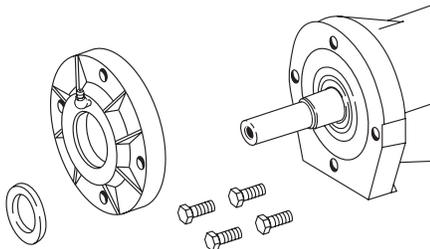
2520/1520 Bearing Cap and Slinger Removed.
